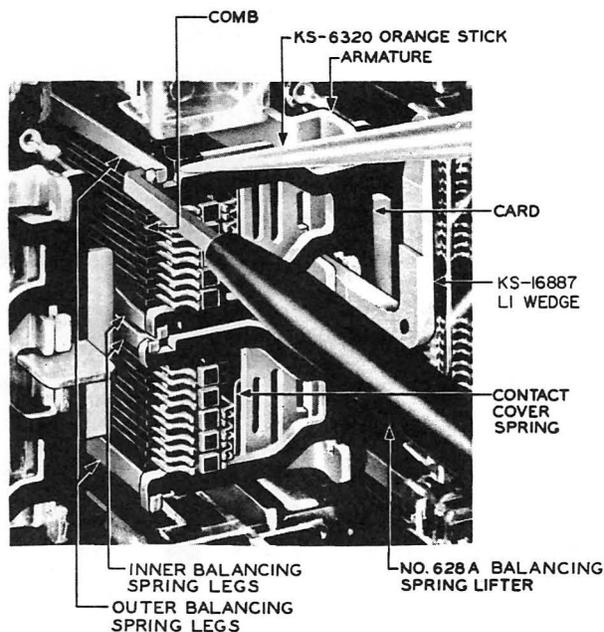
Disengaging Outer Balancing Spring Leg From Upper Card
